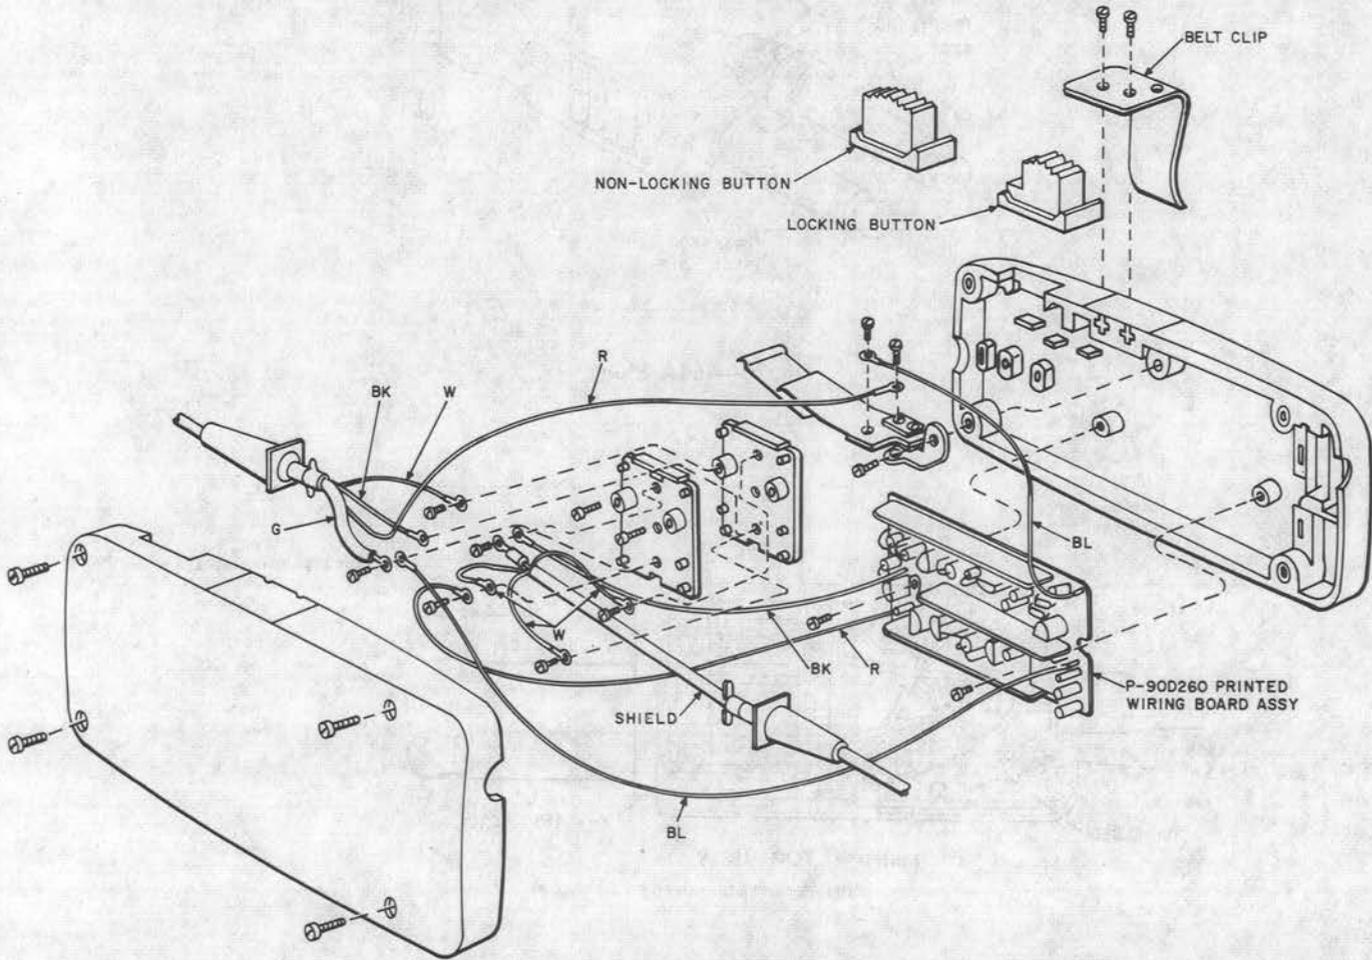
KS-21118 L58, L59, and L60 Switch and P-90D215 Printed Wiring Board Assembly
